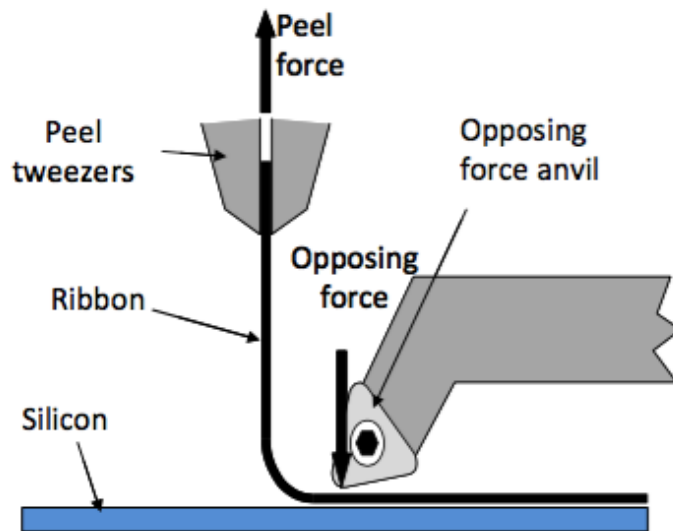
Improved testing of solder busbar proposed by Klengel [332], where an extra opposing holding force controls the peel (pull) angle.
